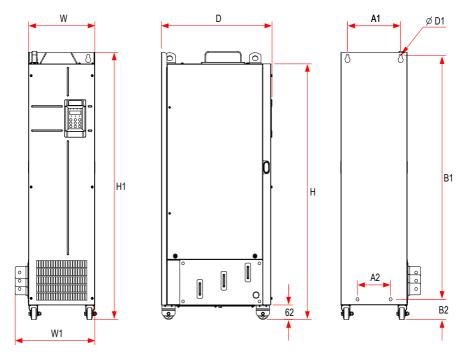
External dimensions and mounting dimensions of 200–450 kW AC drive models (without the reactor base)
